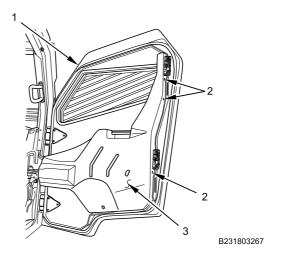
Cabin Door Trim Panel Fasteners Installation.
